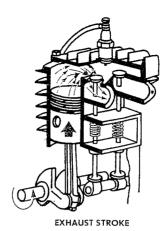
The piston moves up, pushing out the burned mixture on the exhaust stroke. (Briggs & Stratton Corp.)
